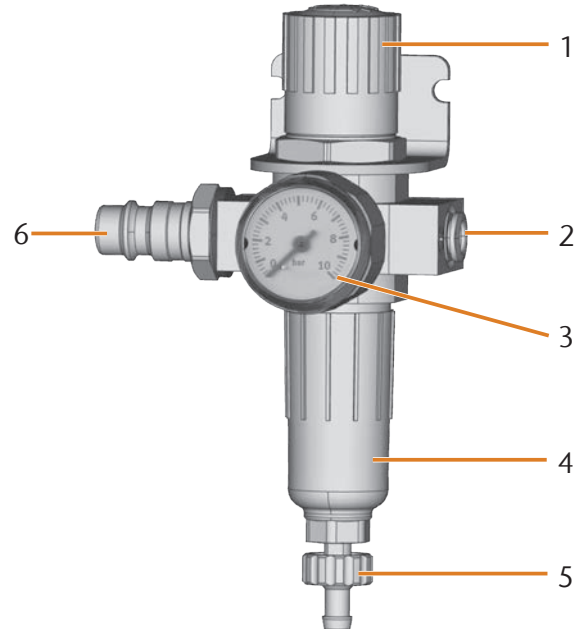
THE SERVICE UNIT: REGULATING AND CHECKING THE AIR PRESSURE
